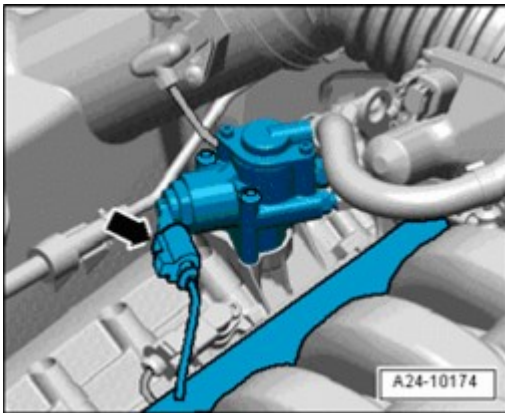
Disconnecting Electrical Connector At Fuel Metering Valve 2 N290 On Right High Pressure Pump
